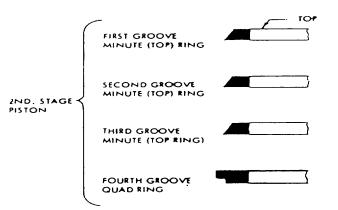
Compressor Second Stage Piston Ring Installation.
